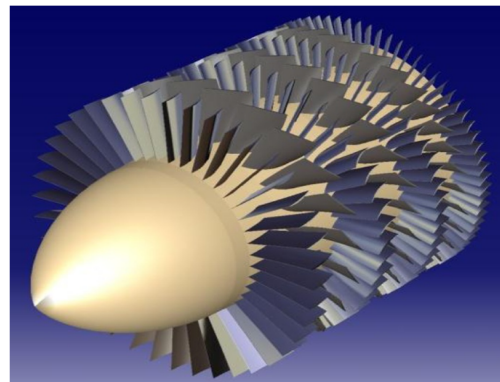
A 3-Dimensional View of the Axial Compressor with Inlet Guide Vane
